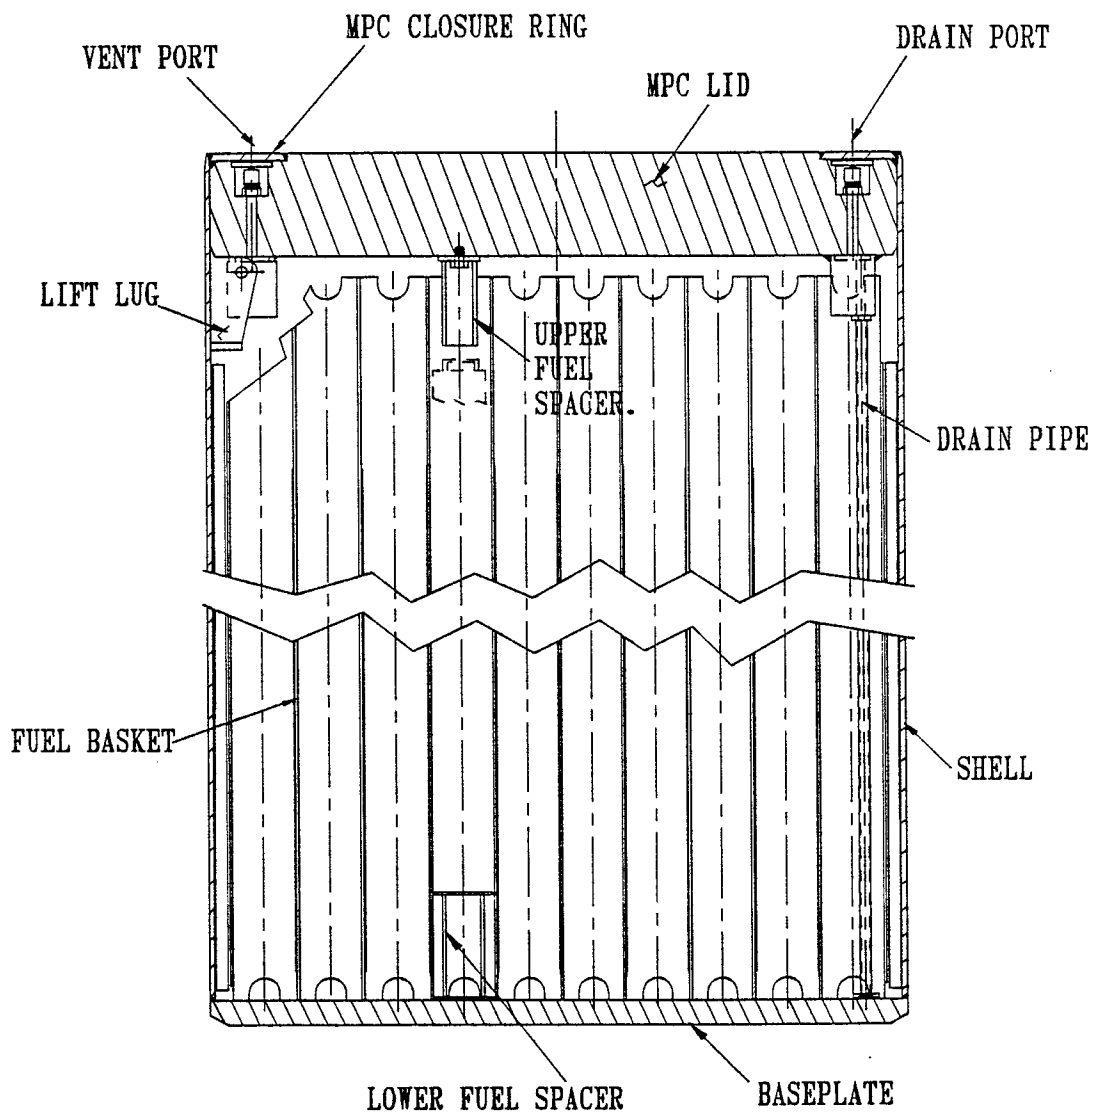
; CROSS SECTION ELEVATION VIEW OF MPC
